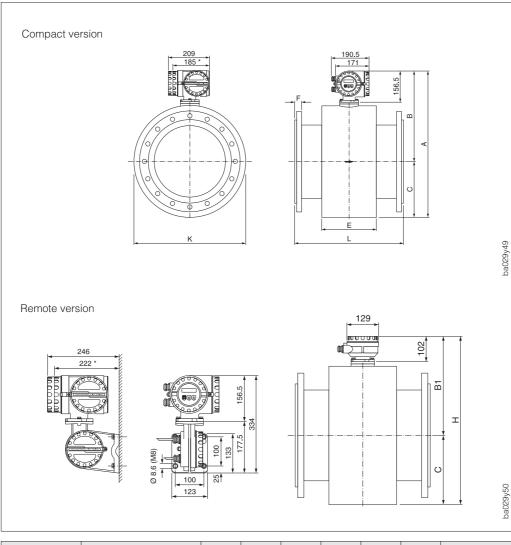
Dimensions Promag 33 F (DN 350...2000)
